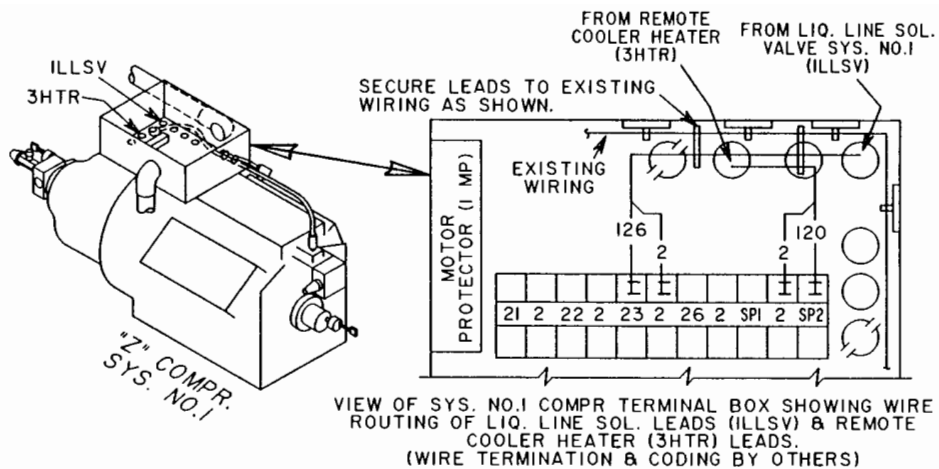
COMPRESSOR TERMINAL BOX WIRING
